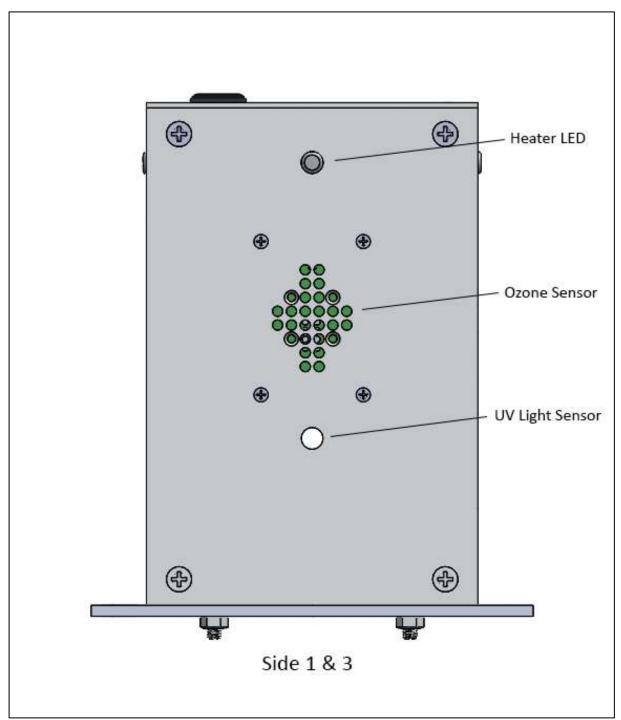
(c) Outer view of design of sides # 1 and 3 of the payload
